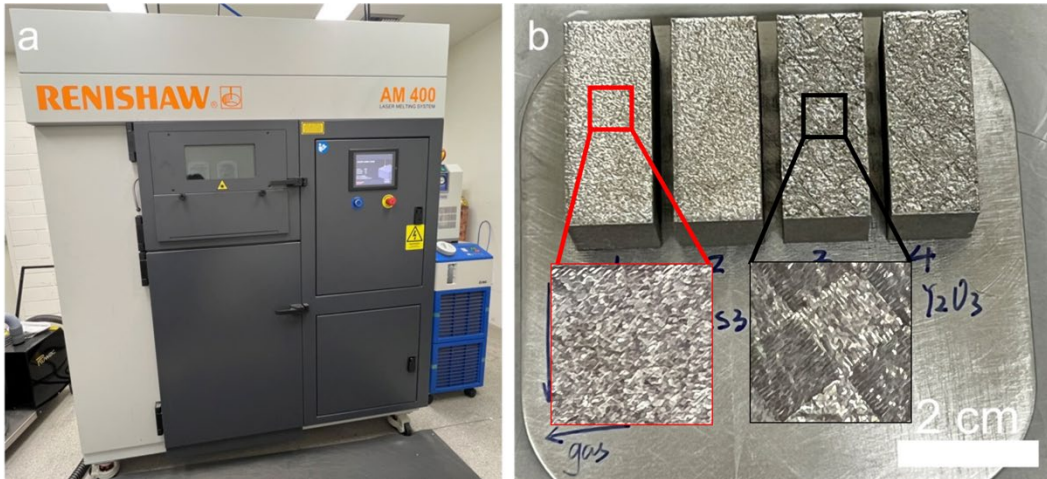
AM printing of ODS SS316L. (a) Renishaw AM400 printer, (b) as printed ODS SS316L, enlarged pictures show the surface morphology of samples printed with meander and chessboard patterns.
